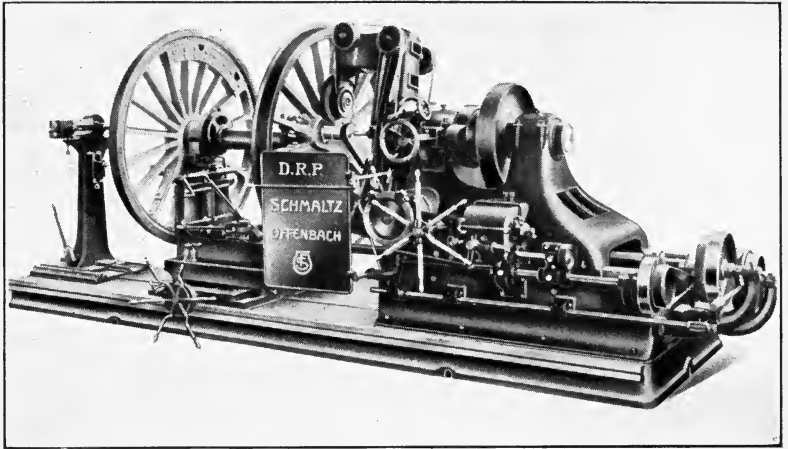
Planetary grinding machine for grinding locomotive crank pins.
